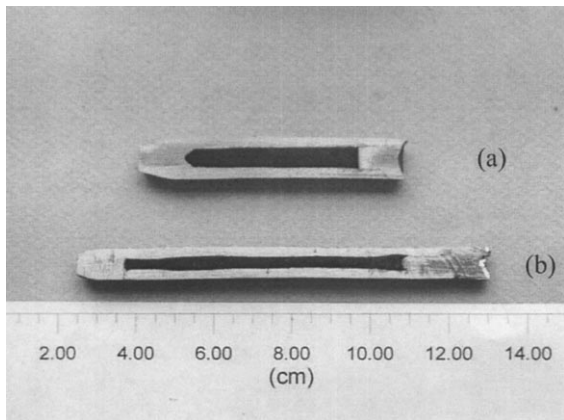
The cross-sectional view of extruded clad rods for extrusion ratios of (a) 1.44; and (b) 2.57.
